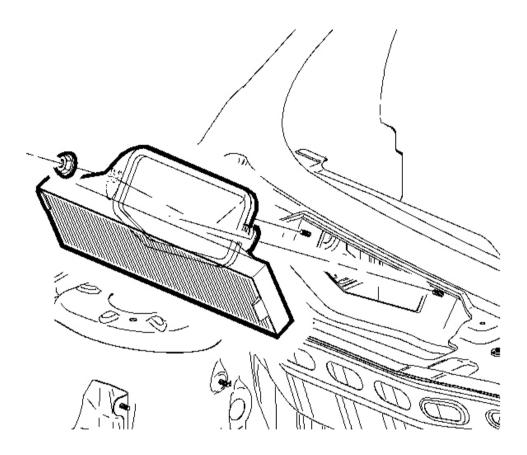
Push Pins & Air Filter Access Panel Courtesy of GENERAL MOTORS CORP.
